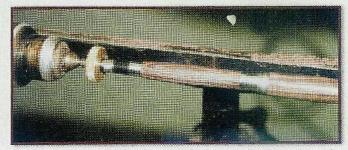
Turn the other blank end of the pen to the correct outside diameter and then turn the large bead on this part, starting about 1-1/8" from the right-hand end of the blank.
